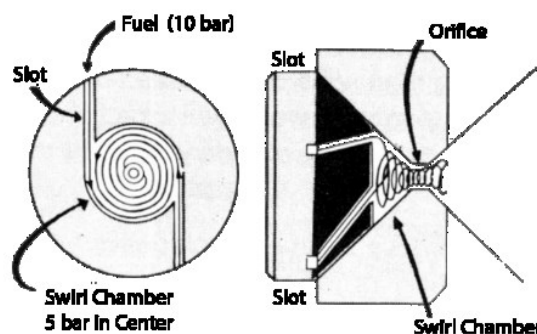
Swirl distributor and chamber of simplex atomizer, top view (left), side view (right) [2000, Delavan-Nozzles]
